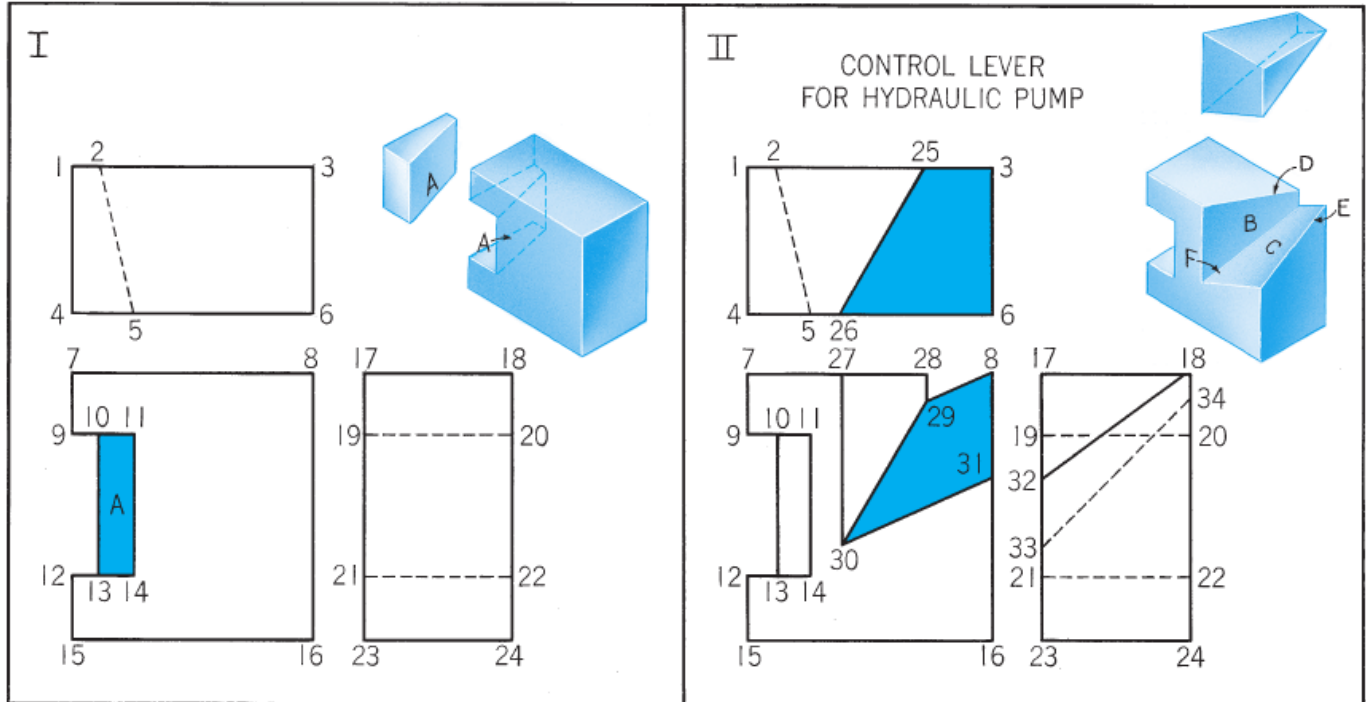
Machining a Control Lever—Inclined and Oblique Surfaces.
